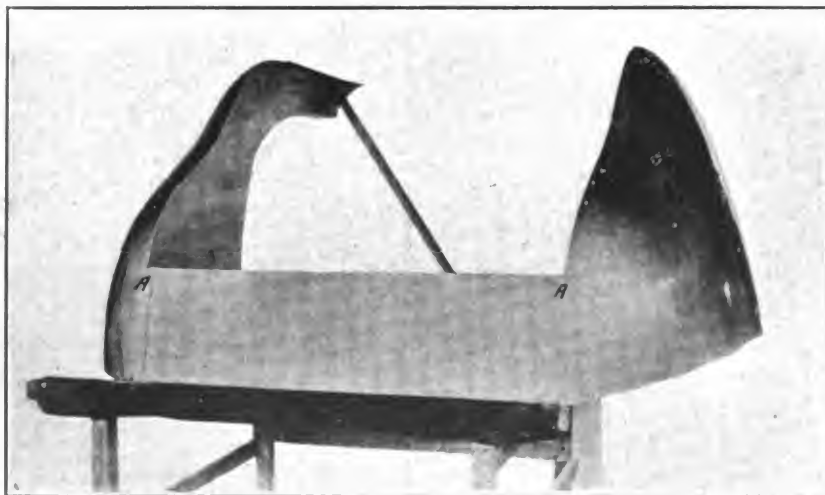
Back quarter panels of a Franklin roadster extending from the door opening on one side around both quarters and across the back, which was welded into one piece at A in four minutes
